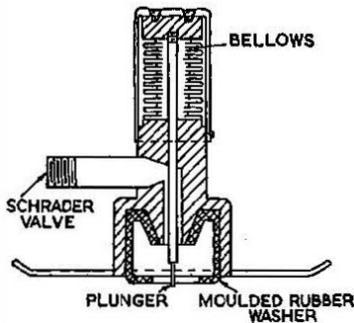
PUNCTURING TOOL FOR TESTS AT JOINTS NOT FITTED WITH SCHRADER VALVES.
